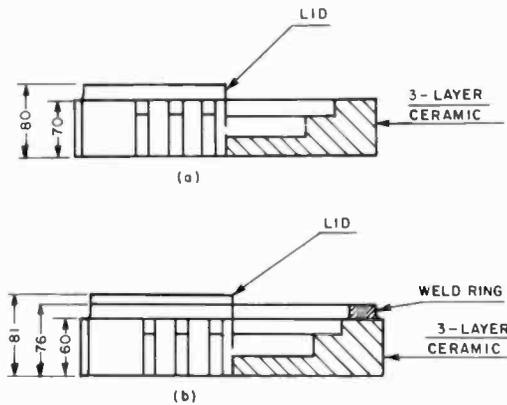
Weld-seal and braze seal packages with and without lid attached. The 64-pin packages measure 0.720 inch square and the 48-pin package 0.560 inch square.
